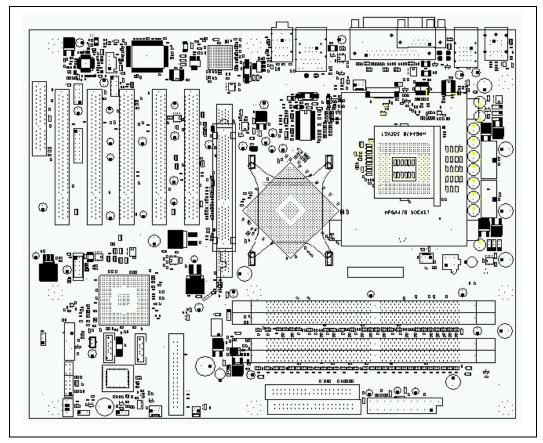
Component Placement Example Using a 4-DIMM ATX Board
